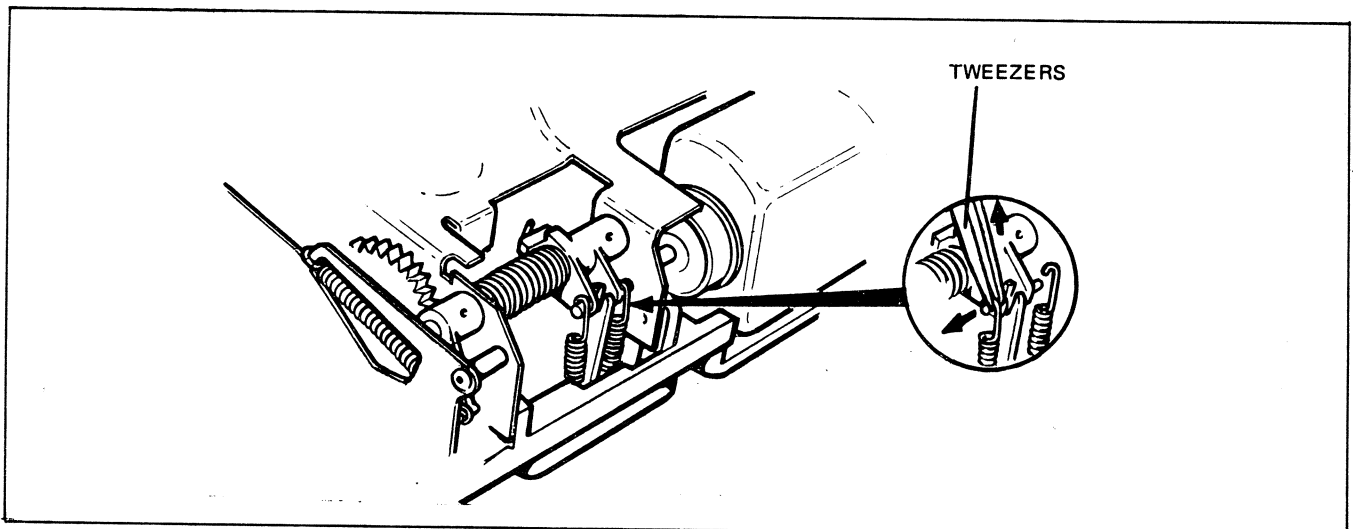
REMOVING OVERRIDE SPRINGS
